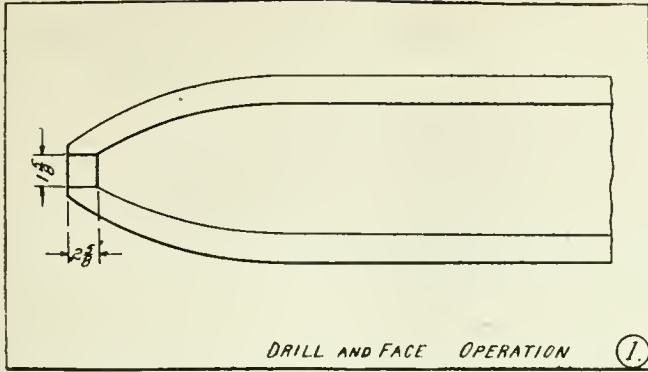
MACHINING OPERATION SHEETS, .92 INS. HIGH EXPLOSIVE SHELL.
